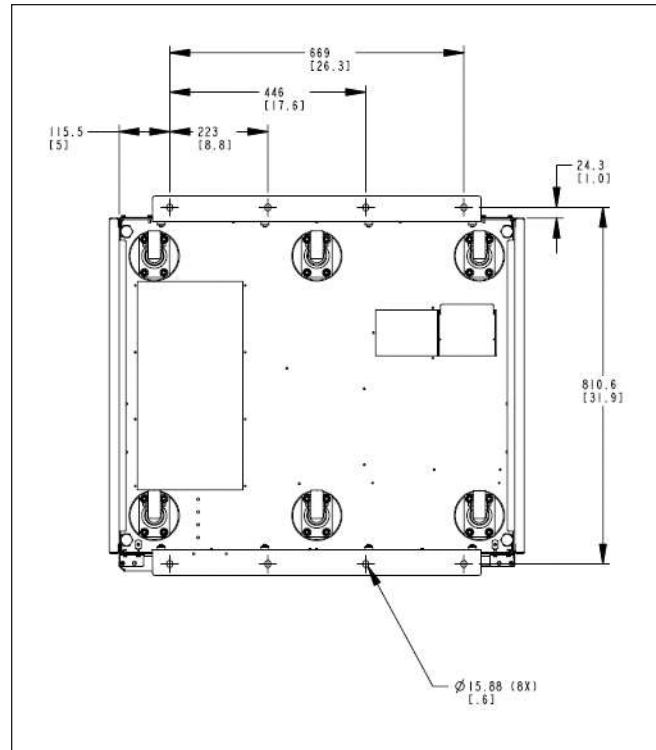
9390 (100–160 kVA) UPS Floor-Mounted
